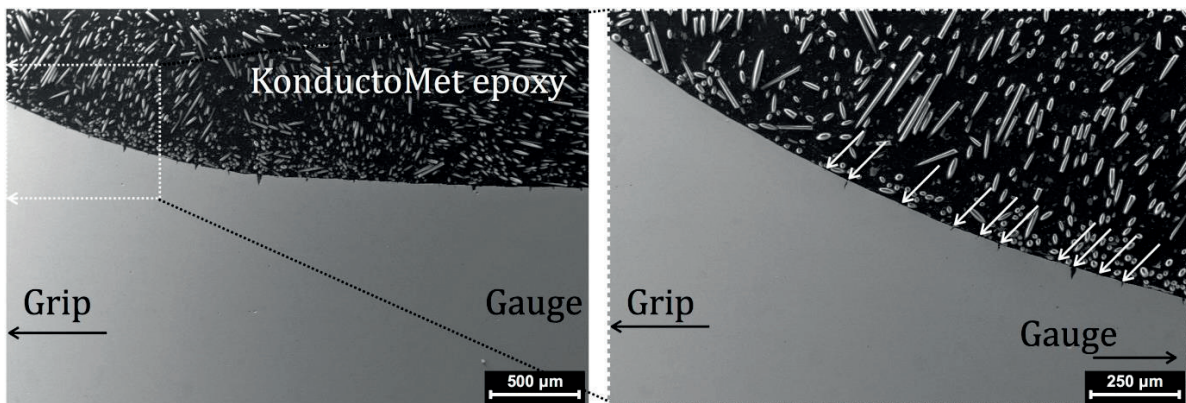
Detail of the cracks formed in the gauge section and in the grip-to-gauge section (left) and a magnified image in the grip-to-gauge section showing the formation of cracks in this region (right).
